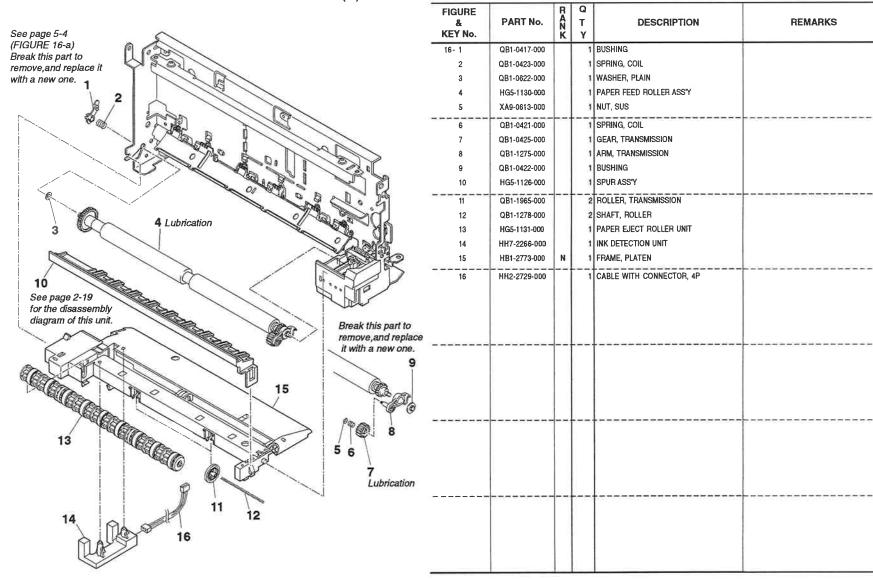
PAPER FEED SECTION (2) & PURGE UNIT
